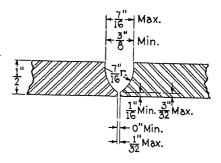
Dimensions of Bevel for Welding ½-in. Plates
